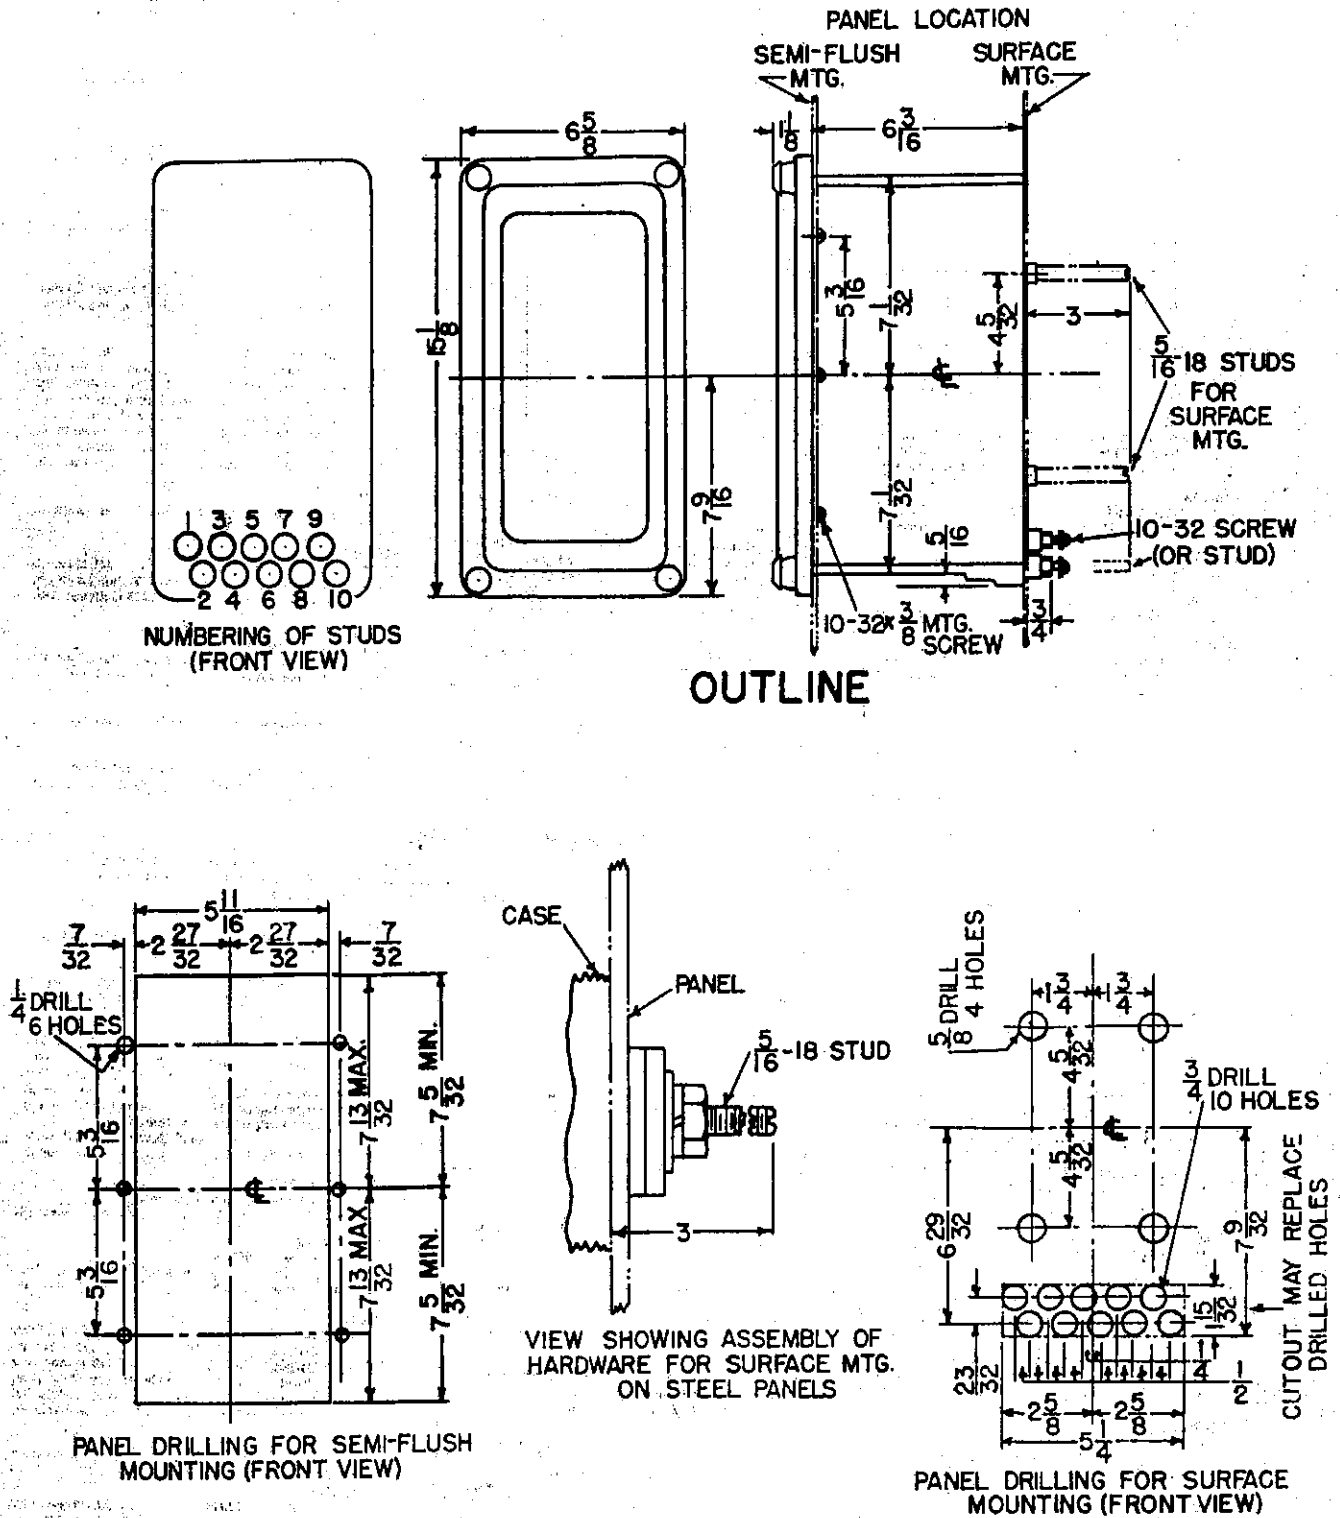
(K-6209273-2) Outline And Panel Drilling Dimensions For The CFF Type Relays
